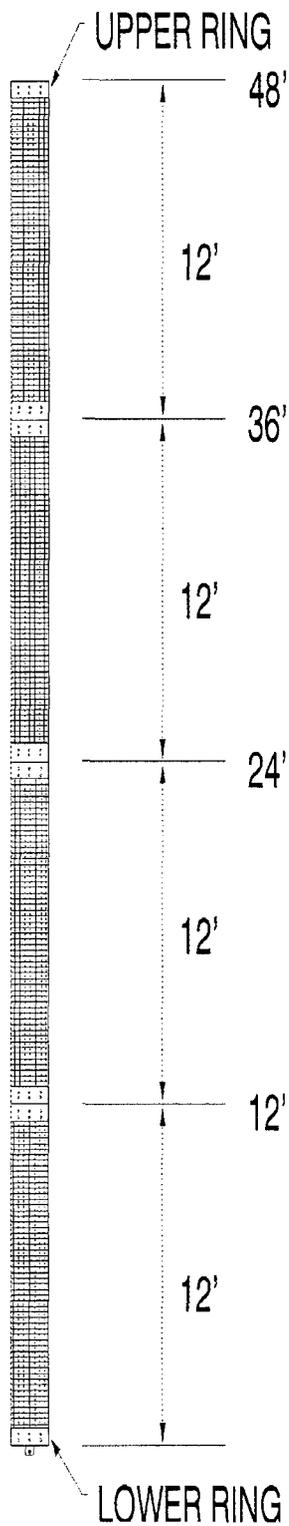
ICE BASKET COLUMN - ELEVATION VIEW
